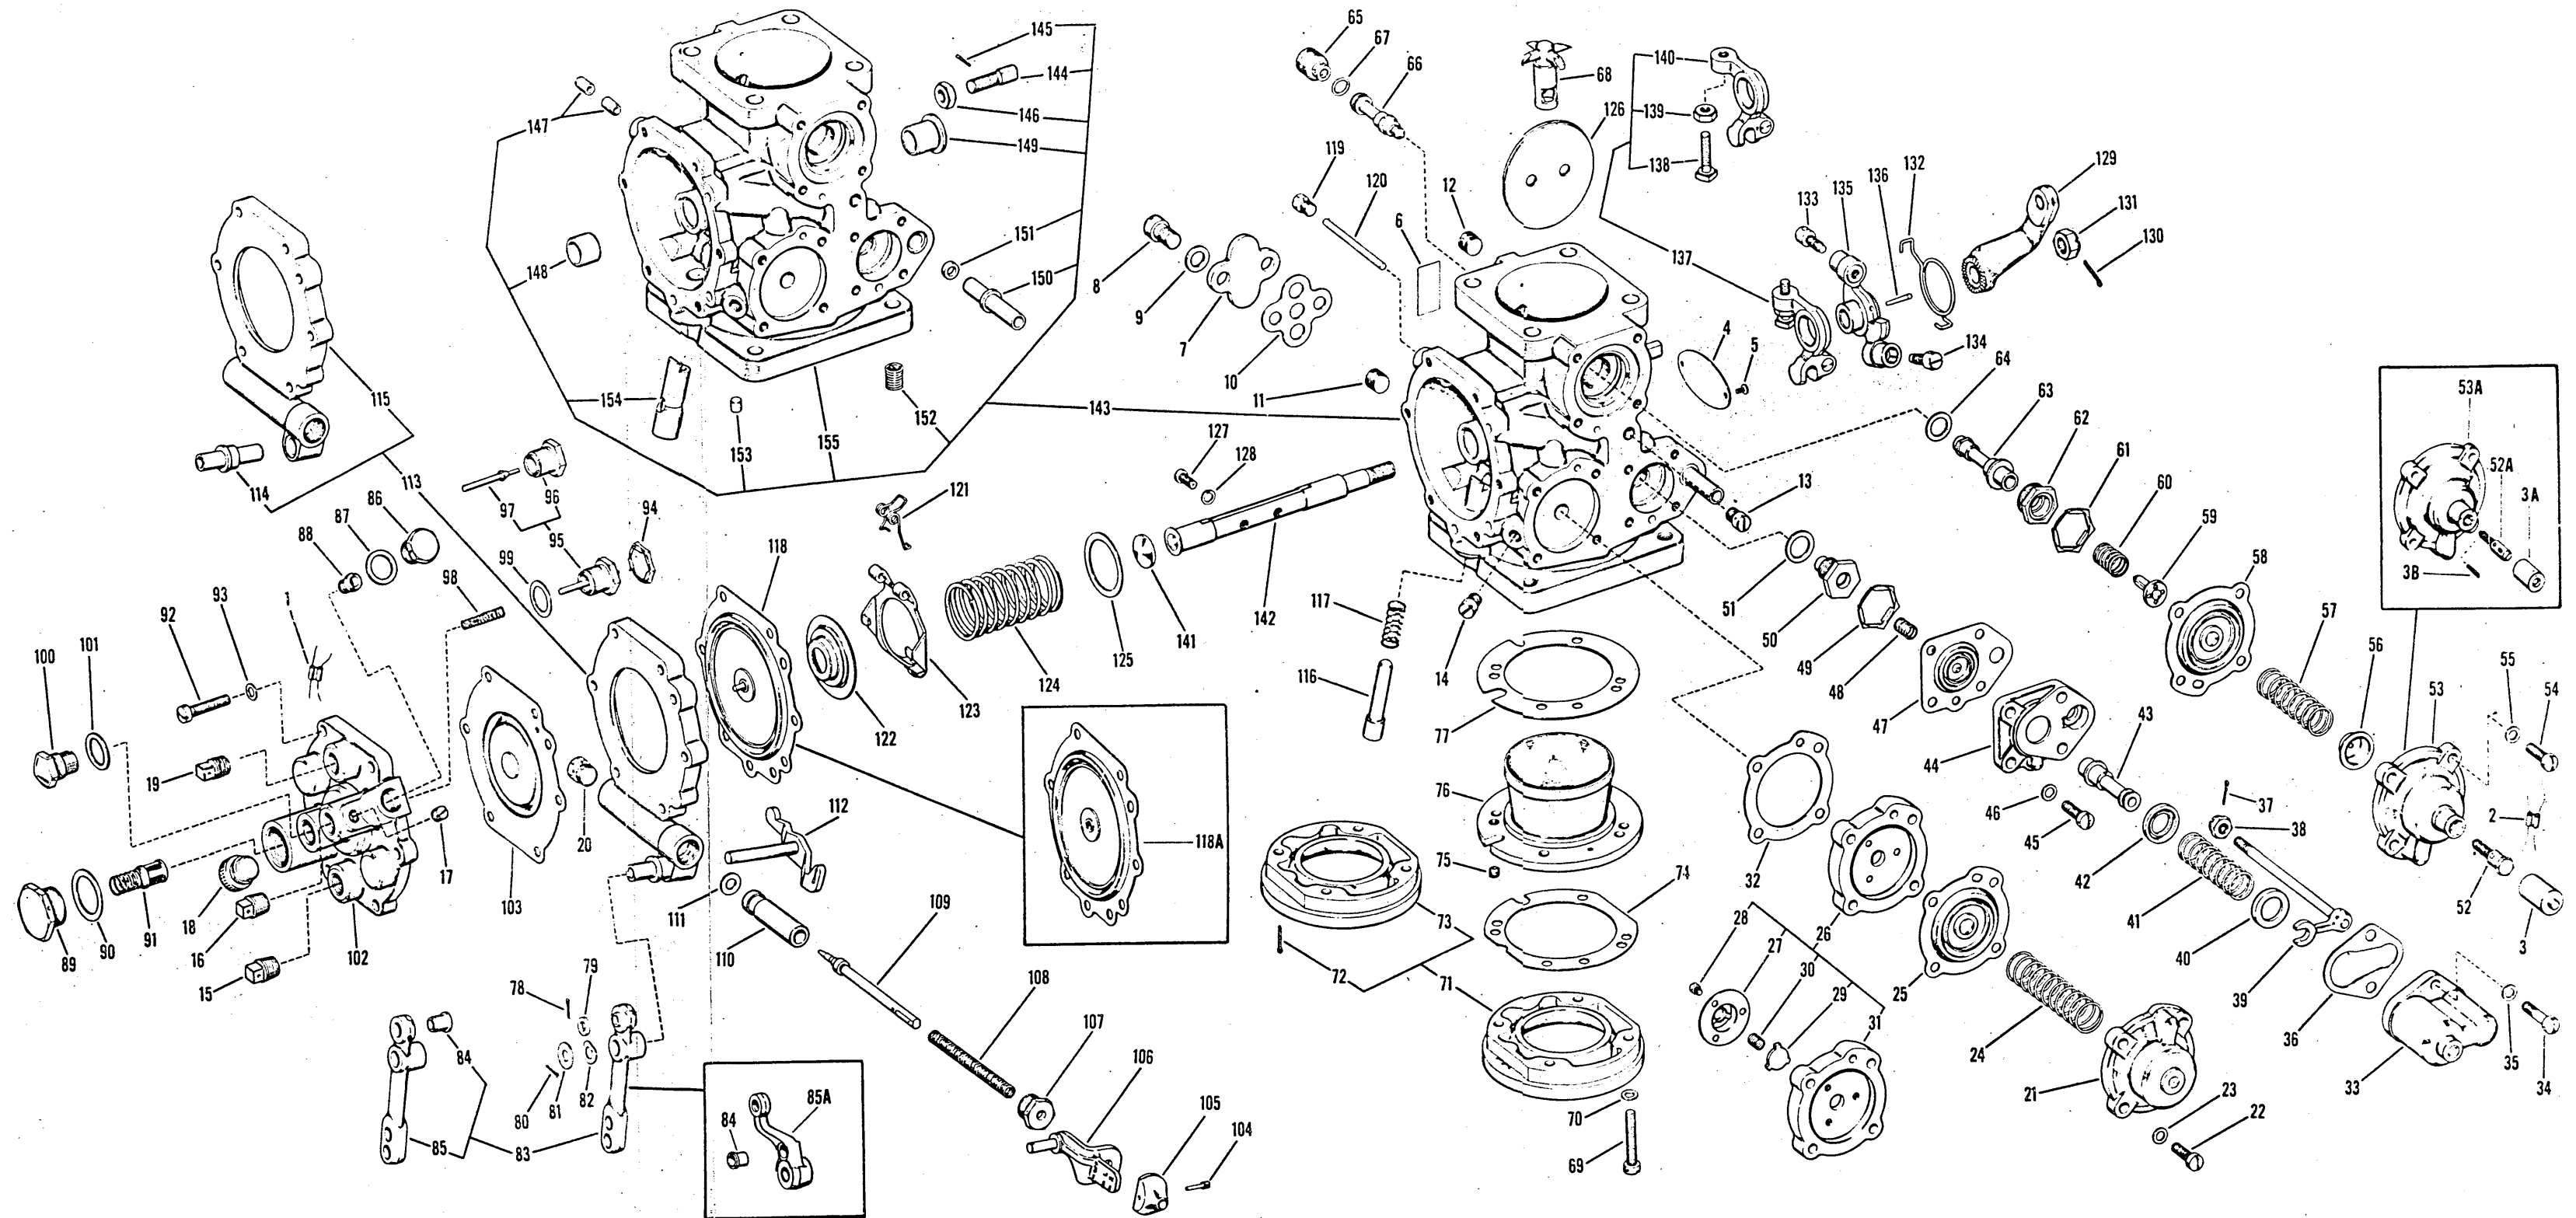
Exploded View of Model PS-5C Injection Carburetor
